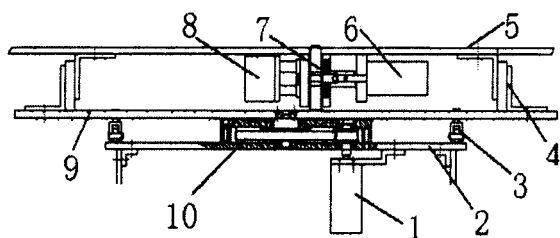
Rotation and slide platform. (1, 6) motor; (2) shell of FDTR; (3) roll bearing; (4) slide rail; (5) slide platform; (7) gear and timing belt; (8) encoder; (9) rotation platform; (10) rotation gear cluster.
